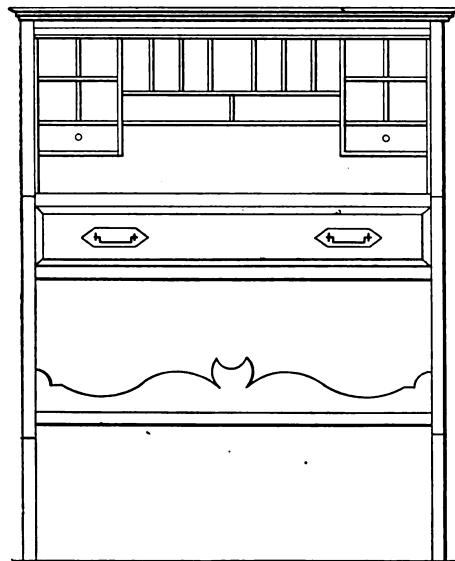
Front Elevation of Desk.—Scale, 1 Inch to the Foot.
